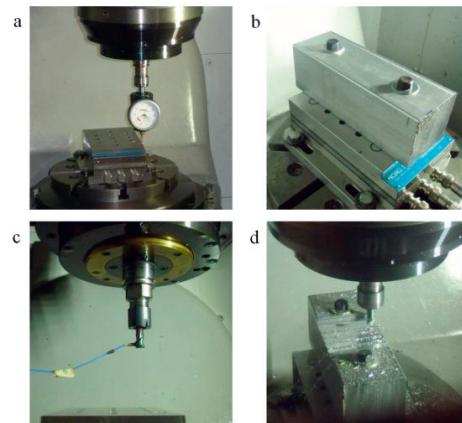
Tests set-up (a) dynamometer (b) workpiece (c) tool (d) slotting tests
